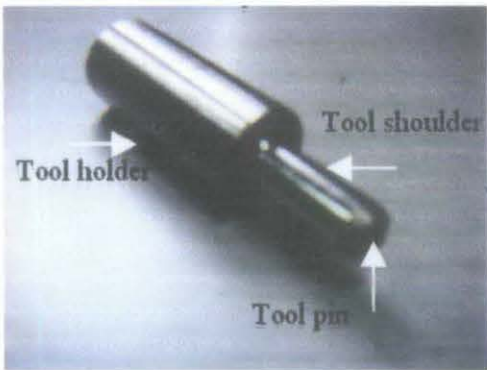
Profiles of Friction Stir Spot Welding (FSSW) tool
